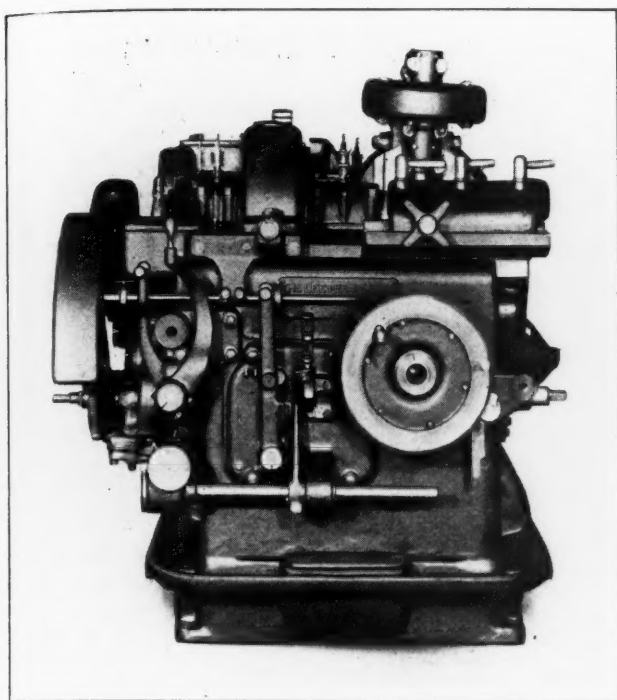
Lees-Bradner Gear Generator of Recent Design
